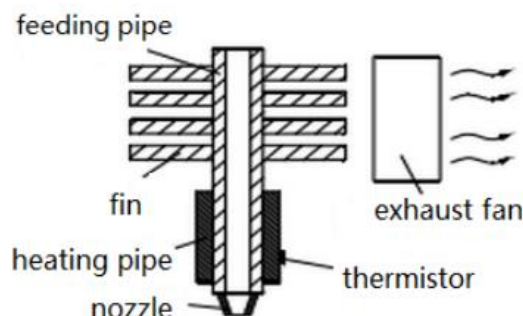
3D Printer (FDM Process) – Nozzle and other components
